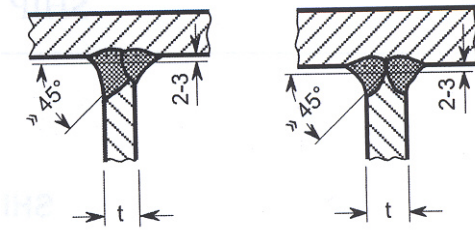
Single and double-bevel welds with full root penetration
